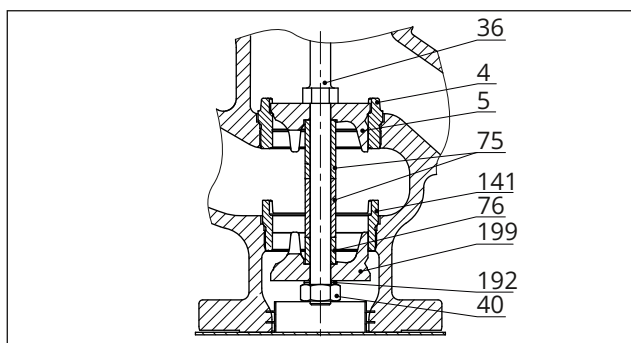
Valve in DN 65/NPS 2½ and larger · Diverting valve
